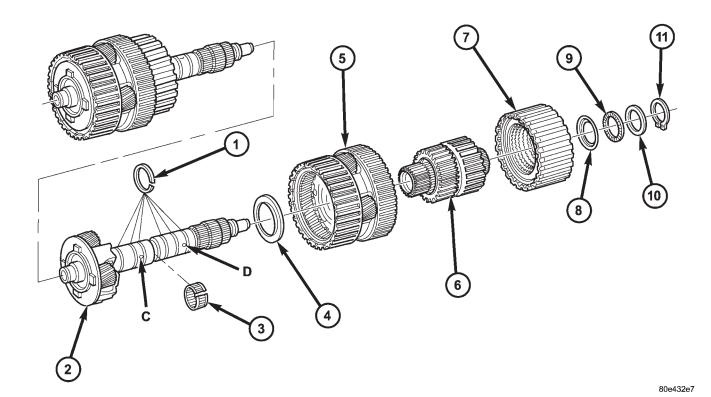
Output Shaft with Center and Rear Planetary Geartrain
